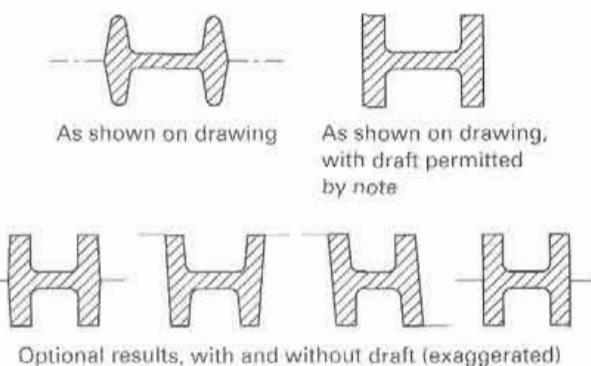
(Top left) Design where the location of the parting plane is specified by the draft. (Top right) Part with draft unspecified. (Bottom) Various options to produce the top-right part, including a no-draft design.
